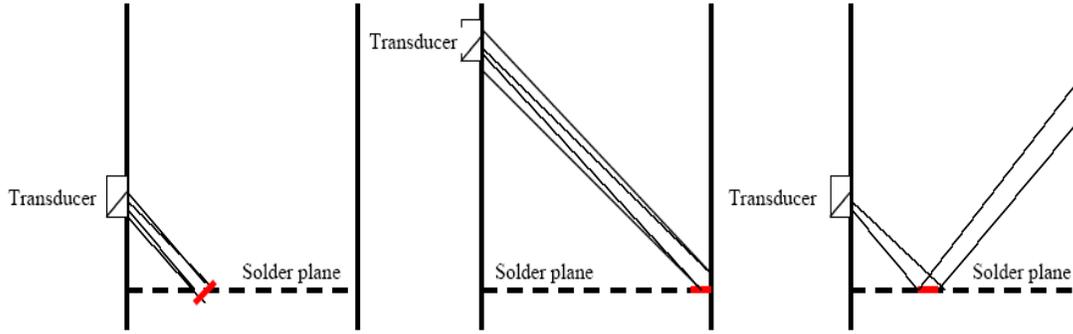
Flaw detection by single angle-beam transducer inspection. Inner imperfections normal to the probe beam (left) or edge imperfections parallel to the solder plane (centre) are detected, but inner imperfections parallel to the solder plane (right) are lost
